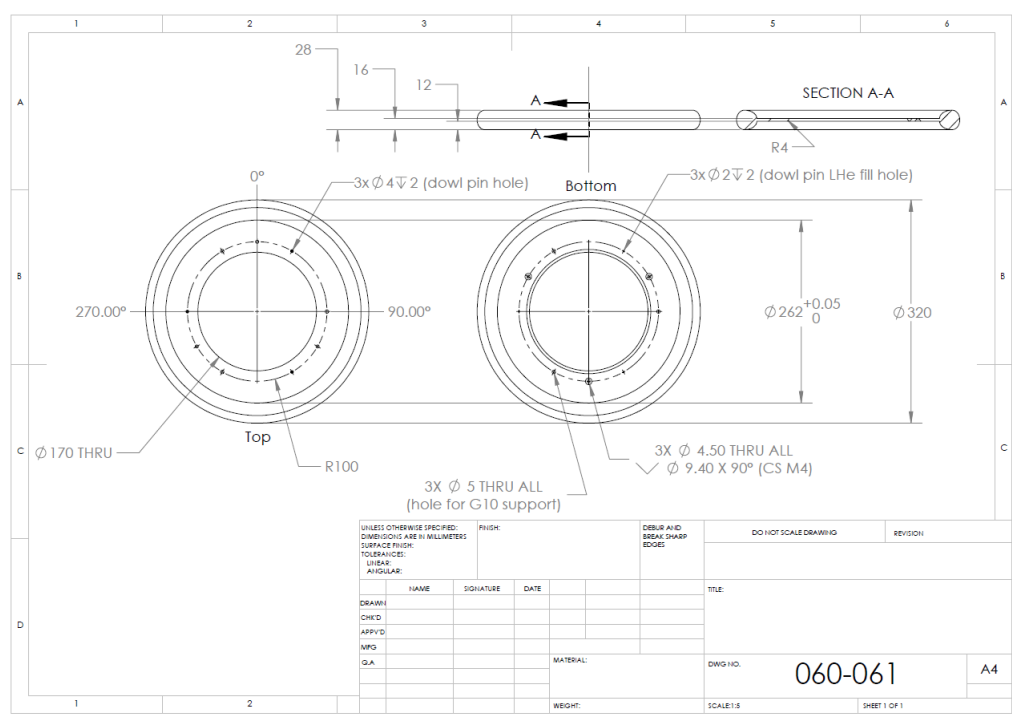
Drawing of the ground electrode corona ring. This ring has additional holes for the G10 support rods.
